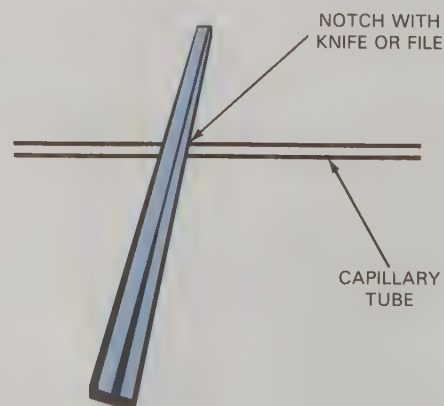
Proper method for cutting a capillary tube, without closing the hole, is to first notch the tube with a knife or file. Then, bend the tubing back and forth until it breaks at the notch.
